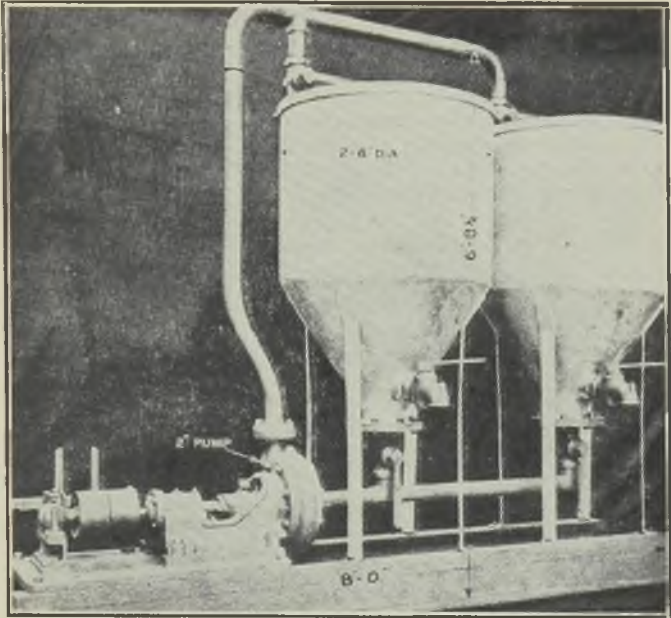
MIXING APPARATUS FOR CORE AND MOULD WASHES.
